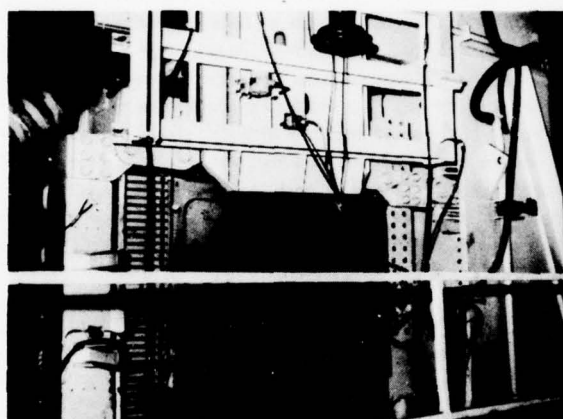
TEST PANEL, ENVIRONMENTAL JIG
